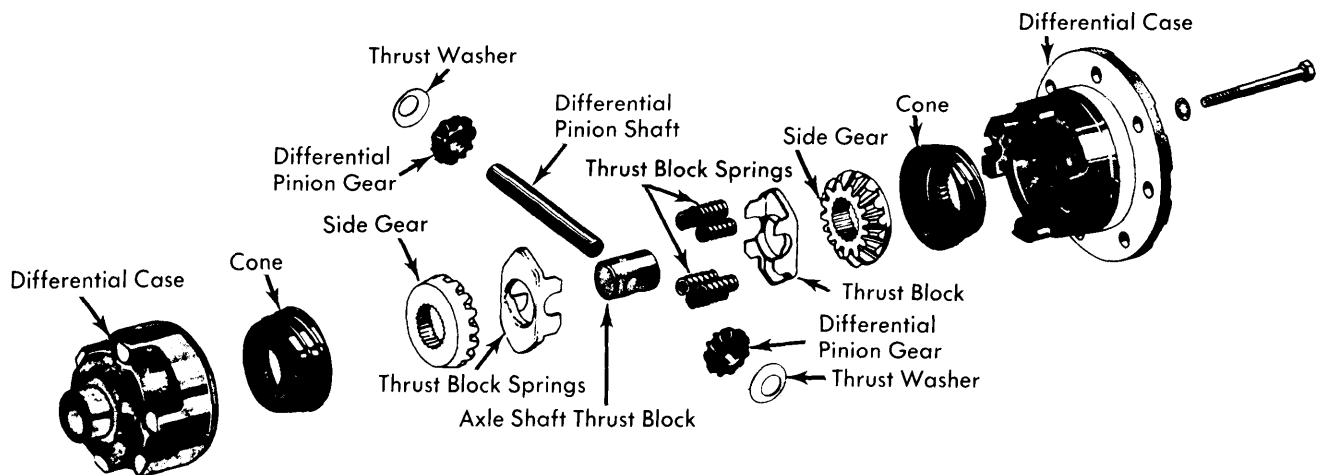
American Motors 7 $\frac{9}{16}$ " Twin Grip Differential
